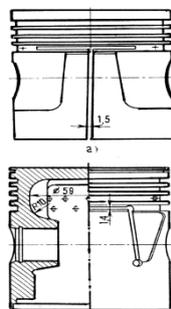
Monometallic pistons of carburetor engines: a) T-shaped; b) U-shaped form
